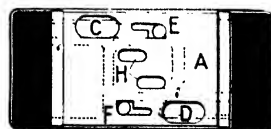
MAIN VALVE BACK—FACED FOR AUXILIARY VALVE
